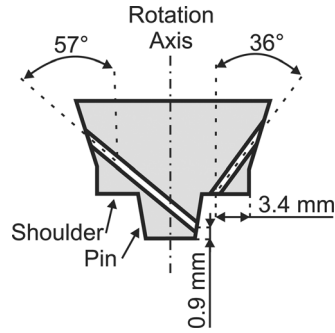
Schematic of through hole locations for the thermocouples on the FSW tool (not to scale, section view). The thermocouples are exposed at the tool-workpiece interface.
